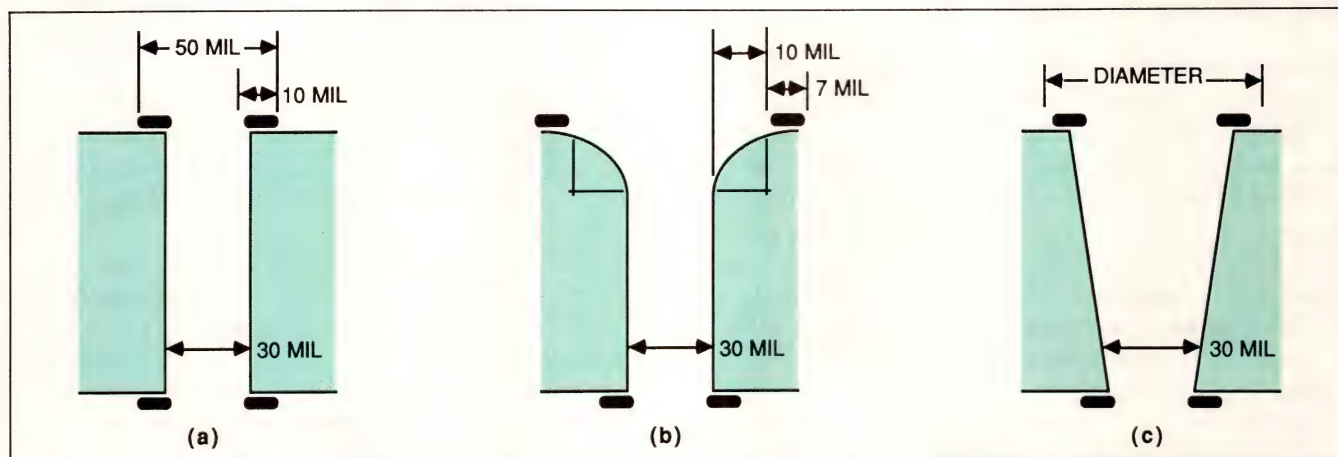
Hole shapes dictate pad requirements for molded circuit boards. Typical pad sizes for normal 30-mil holes (a) and 30-mil holes with a curved surface (b) are 50 and 64 mils, respectively. For a tapered hole (c), pad sizes depend on the size of the hole at each board surface.
